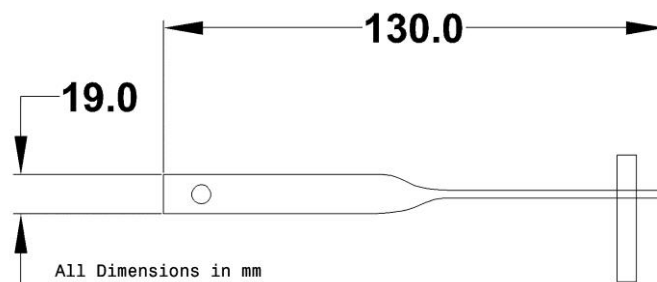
Connecting Rod connecting the Cross Frame and Rocking Frame
